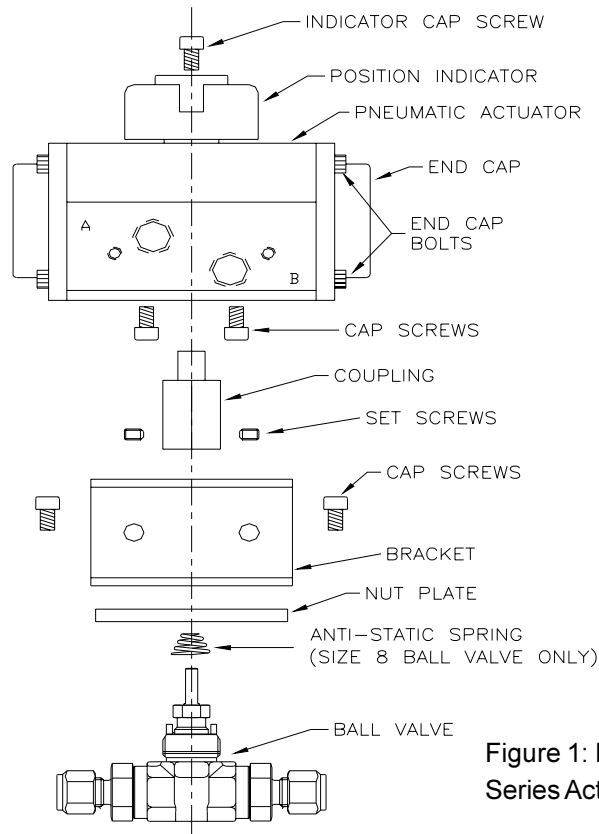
BL Series Valve with 60 Series Actuator Exploded View
